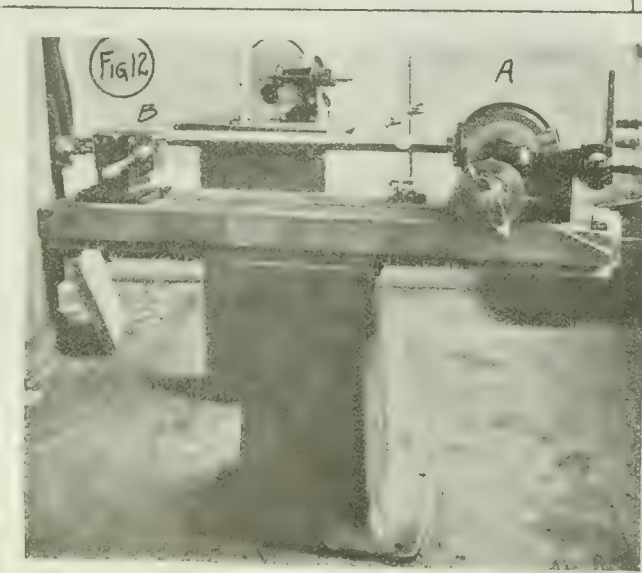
TESTING THE KNEE FOR ALIGNMENT, IN RELATION TO COLUMN. FIG. 11 TESTING THE SPINDLE FOR CONCENTRICITY. FIG. 12 TWO TESTS ON DIVIDING HEADS. FIG. 13 INSPECTION SYSTEM OF STAMPING AS APPLIED TO TABLE.
